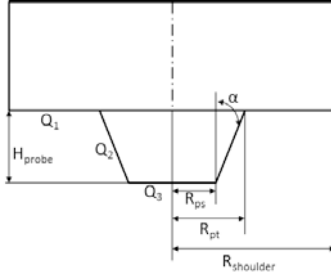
A schematic of a friction stir weld tool showing heat generations at three different locations of the FSW tool.
